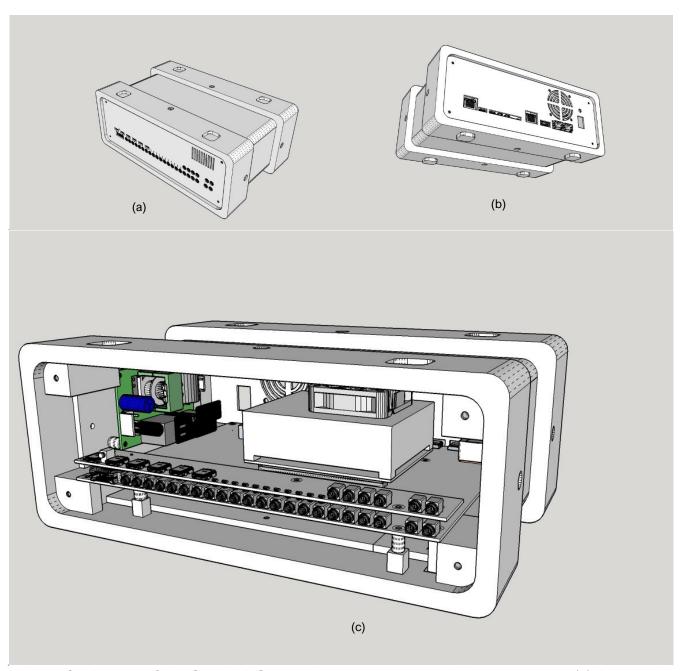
Design of the Gaugit DC16 series multi-channel digitizer enclosure. (a) Front and top views, (b) Rear and bottom views, demonstrating the possibility of digitizers stacking. In (c) shows the digitizer boards accommodated inside the enclosure with the Meanwell RPS-120S-12 power supply on the left of the module.
